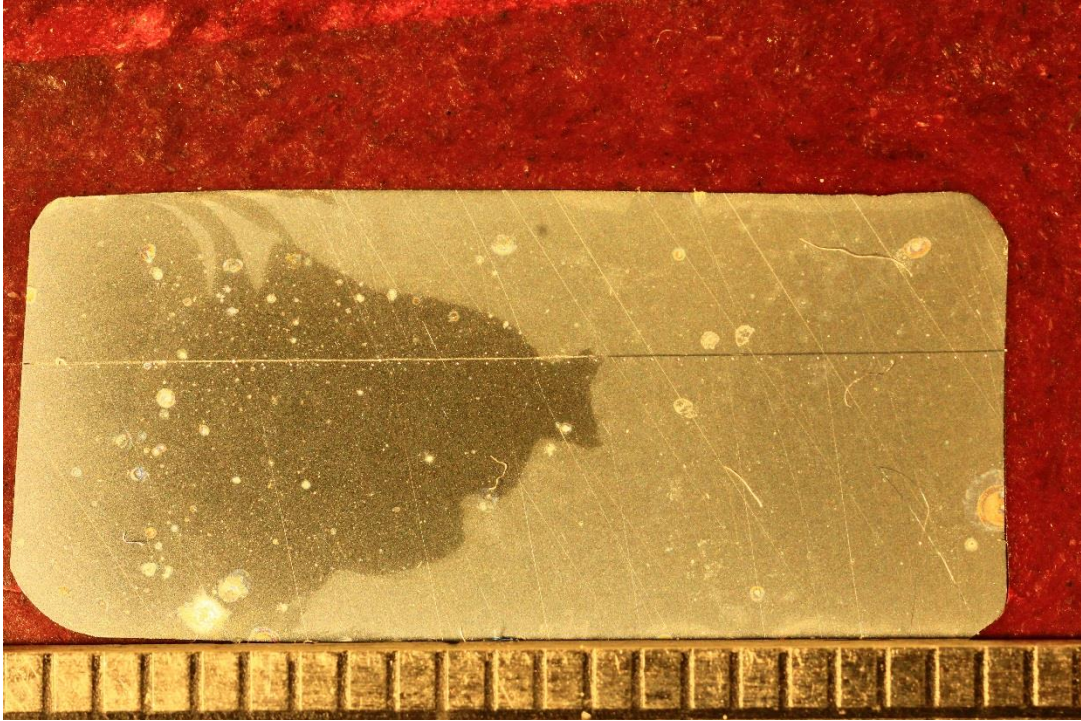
Macrograph of Weld 2 Sample 1
